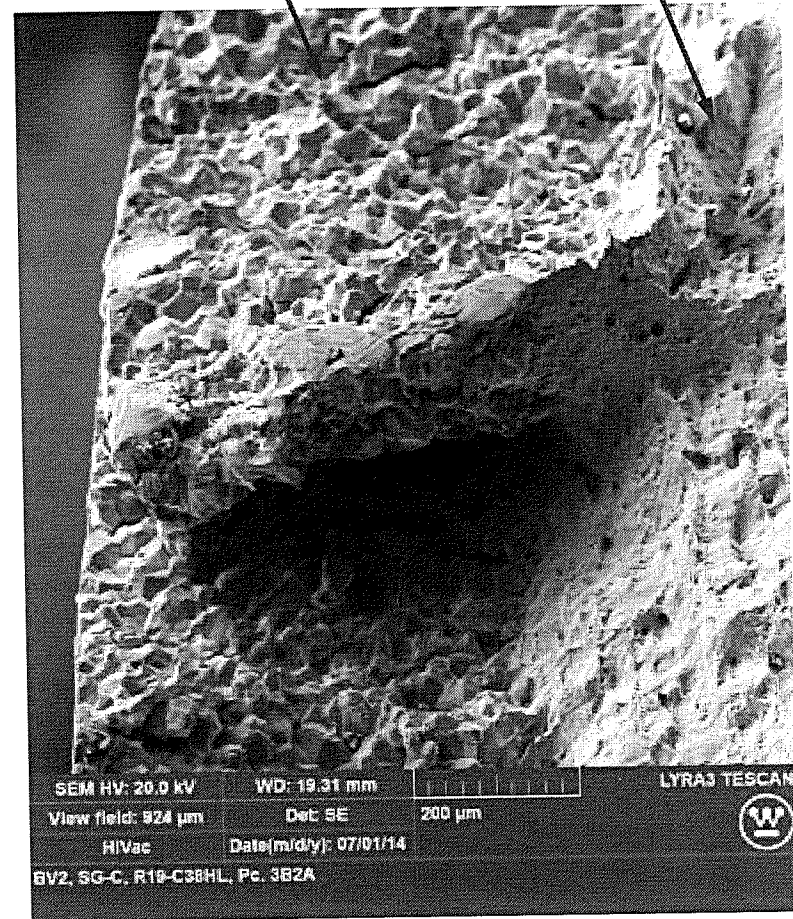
Example of R19C38-3B Burst Opening Fracture Surface (Near Top End of Crack)
